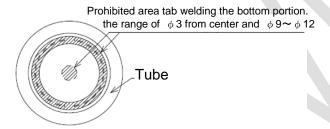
Figure representing the tab welding at bottom portion.
